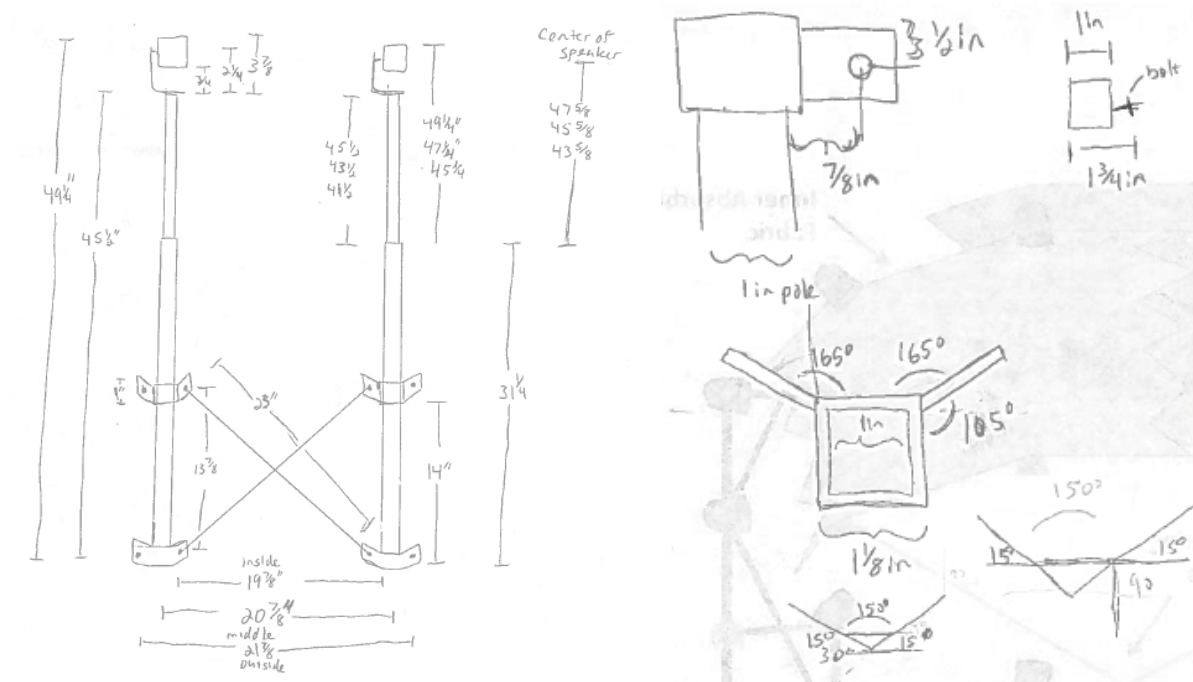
Initial PALAT system frame measurements and custom aluminum joint measurements.
